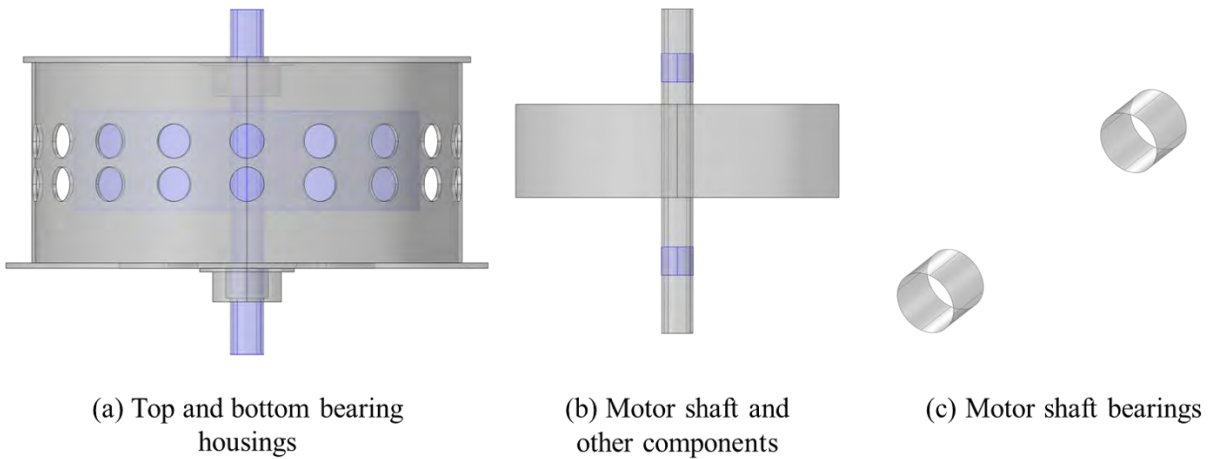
Numerical model representation of the top and bottom bearing housings, where mechanical loads are introduced.
